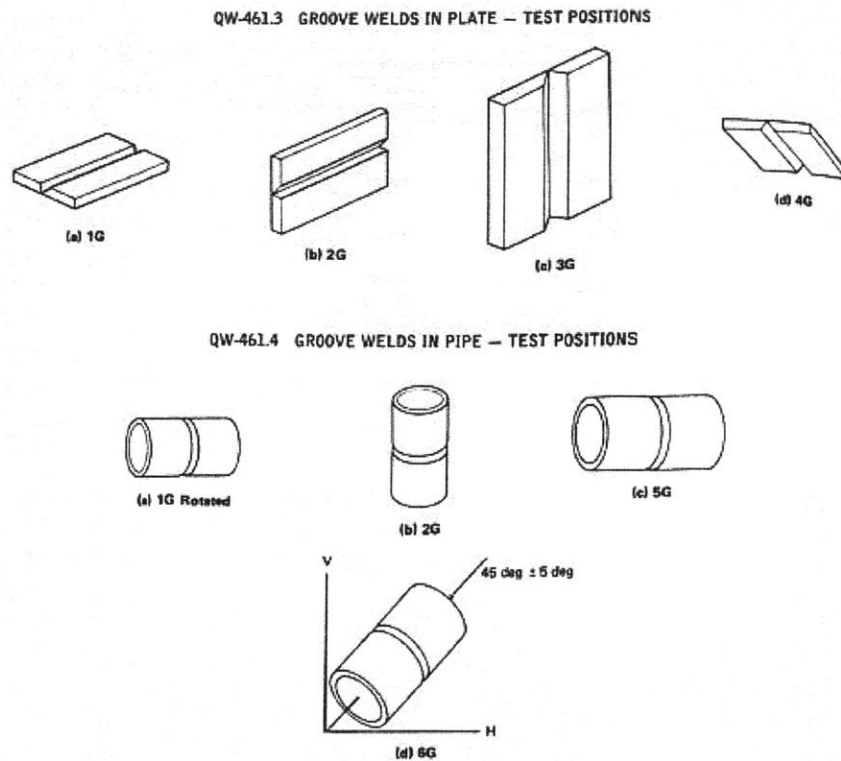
Groove Weld Test Positions [ASME, 2007]
